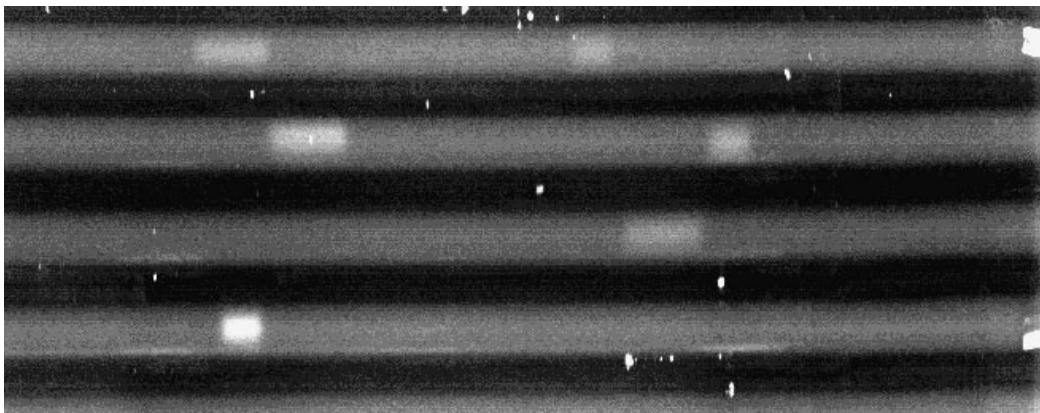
Reconstructed thermal line scanner image showing machined defects in boiler water-wall tubing specimen #1.
